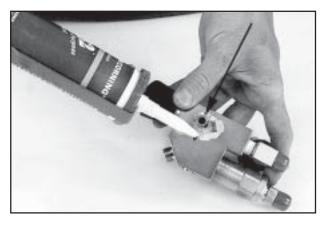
The silicone sealant must not to block the air tube opening.
